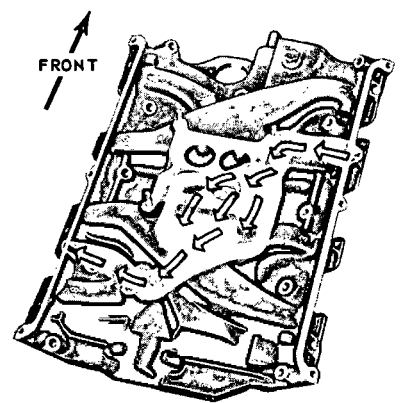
Typical Intake Manifold Exhaust Gas Passages
